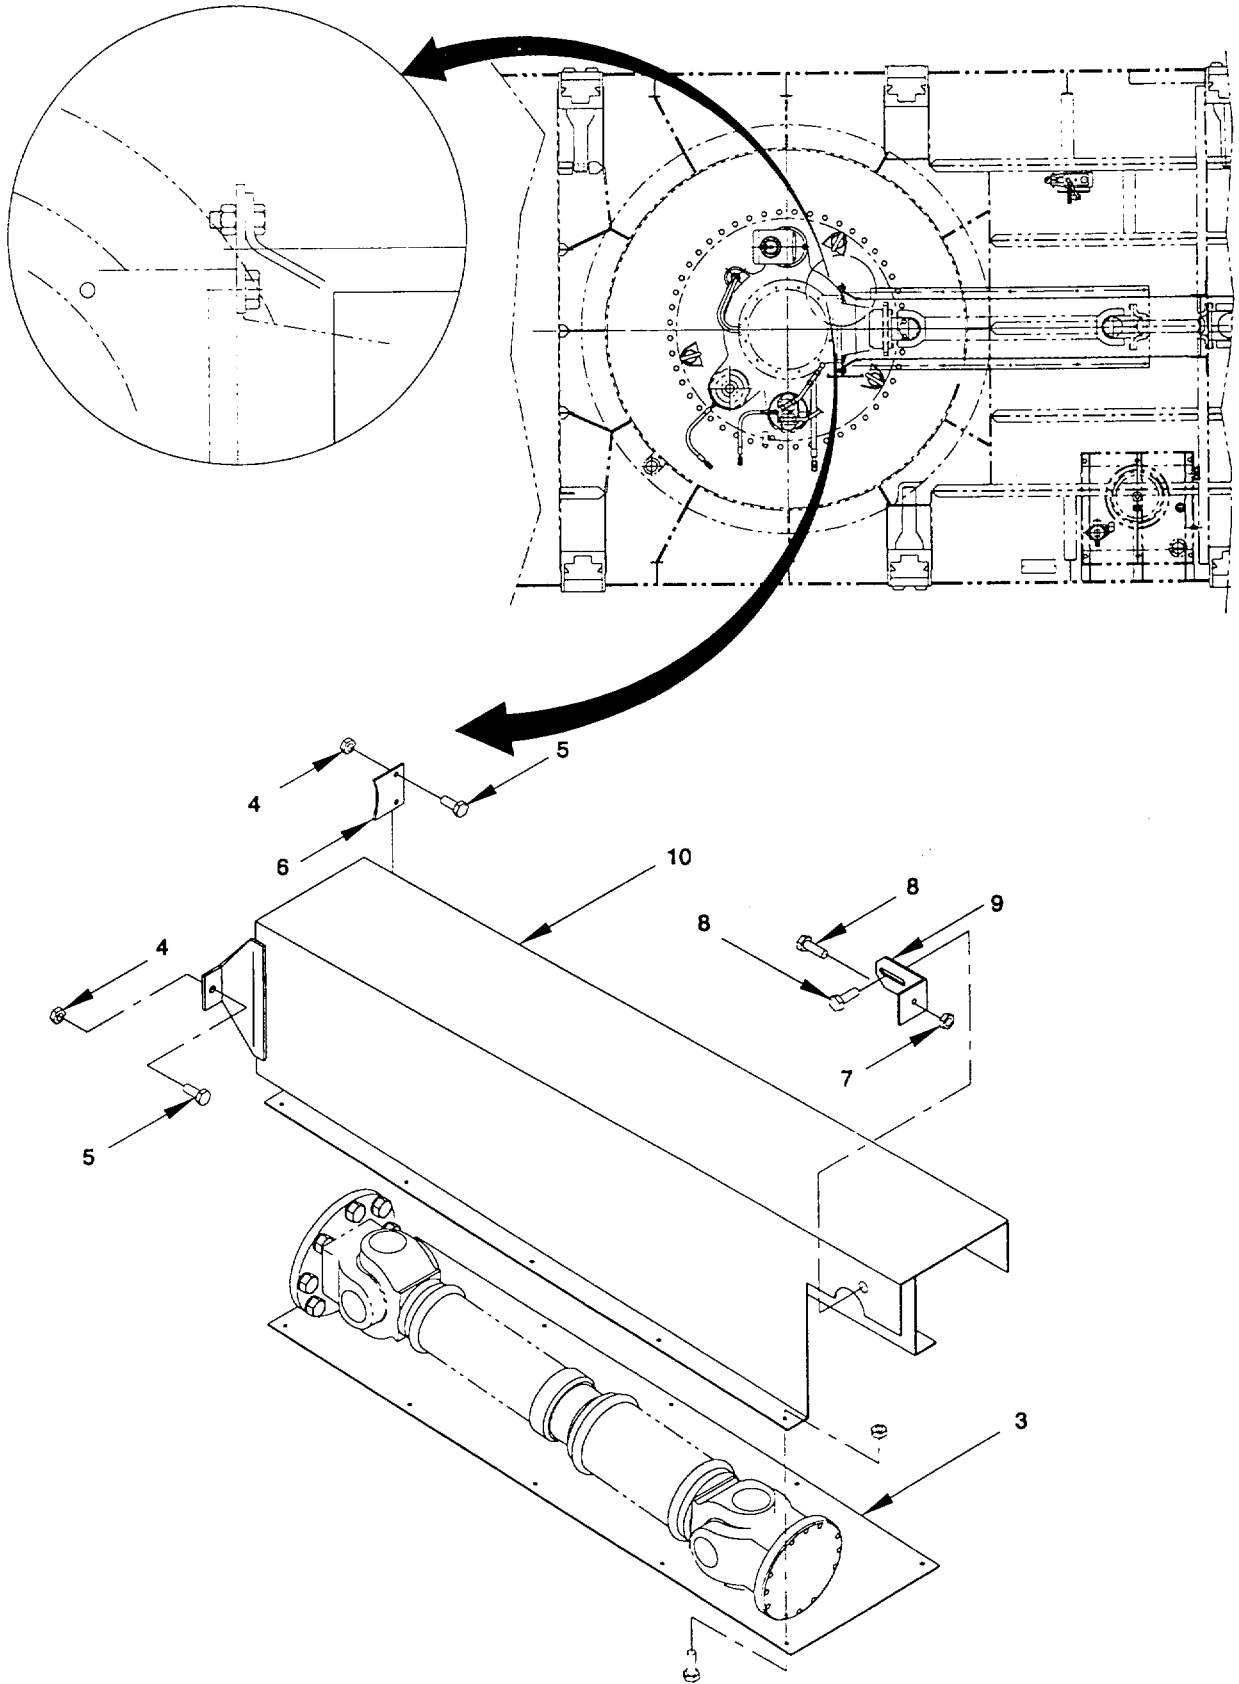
Machinery Guard, Transfer Case to Pump-Jet, Remove/Install.
